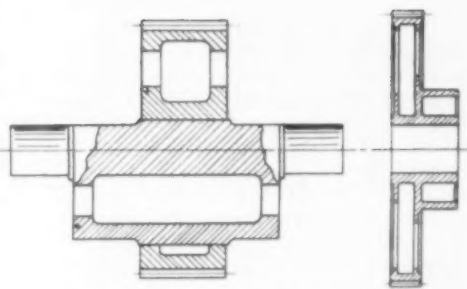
The double eccentric with a keyed-on wheel designed by Walter Samuel Wilkins in 1933
